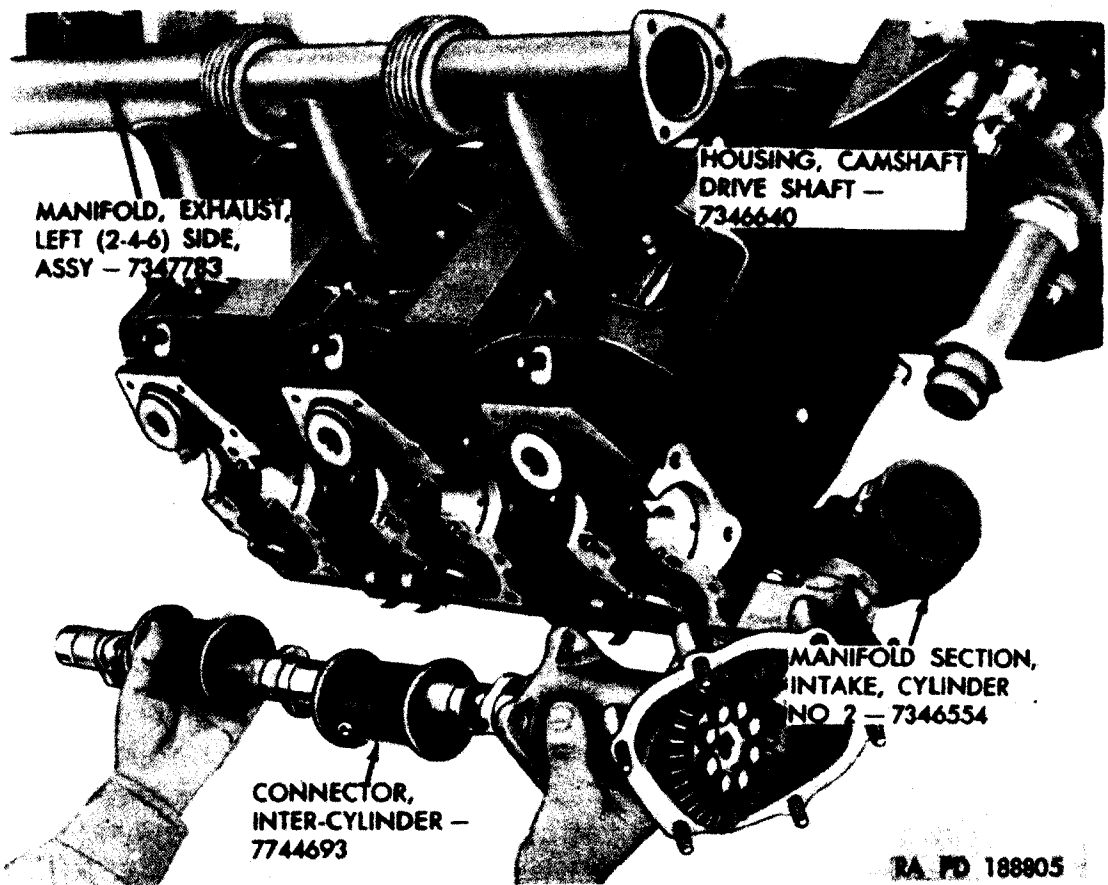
Removing camshaft and gear housing—left (2-4-6) side.
